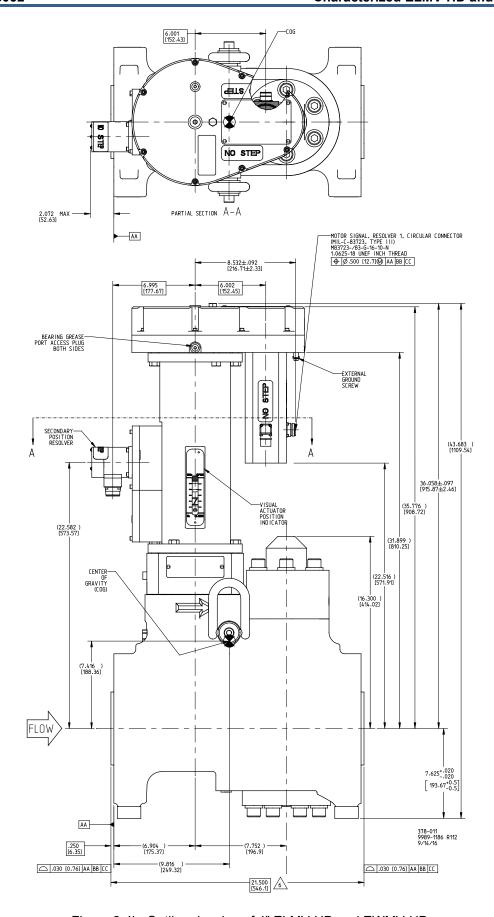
Outline drawing of 4" ELMV-HD and EWMV-HD
